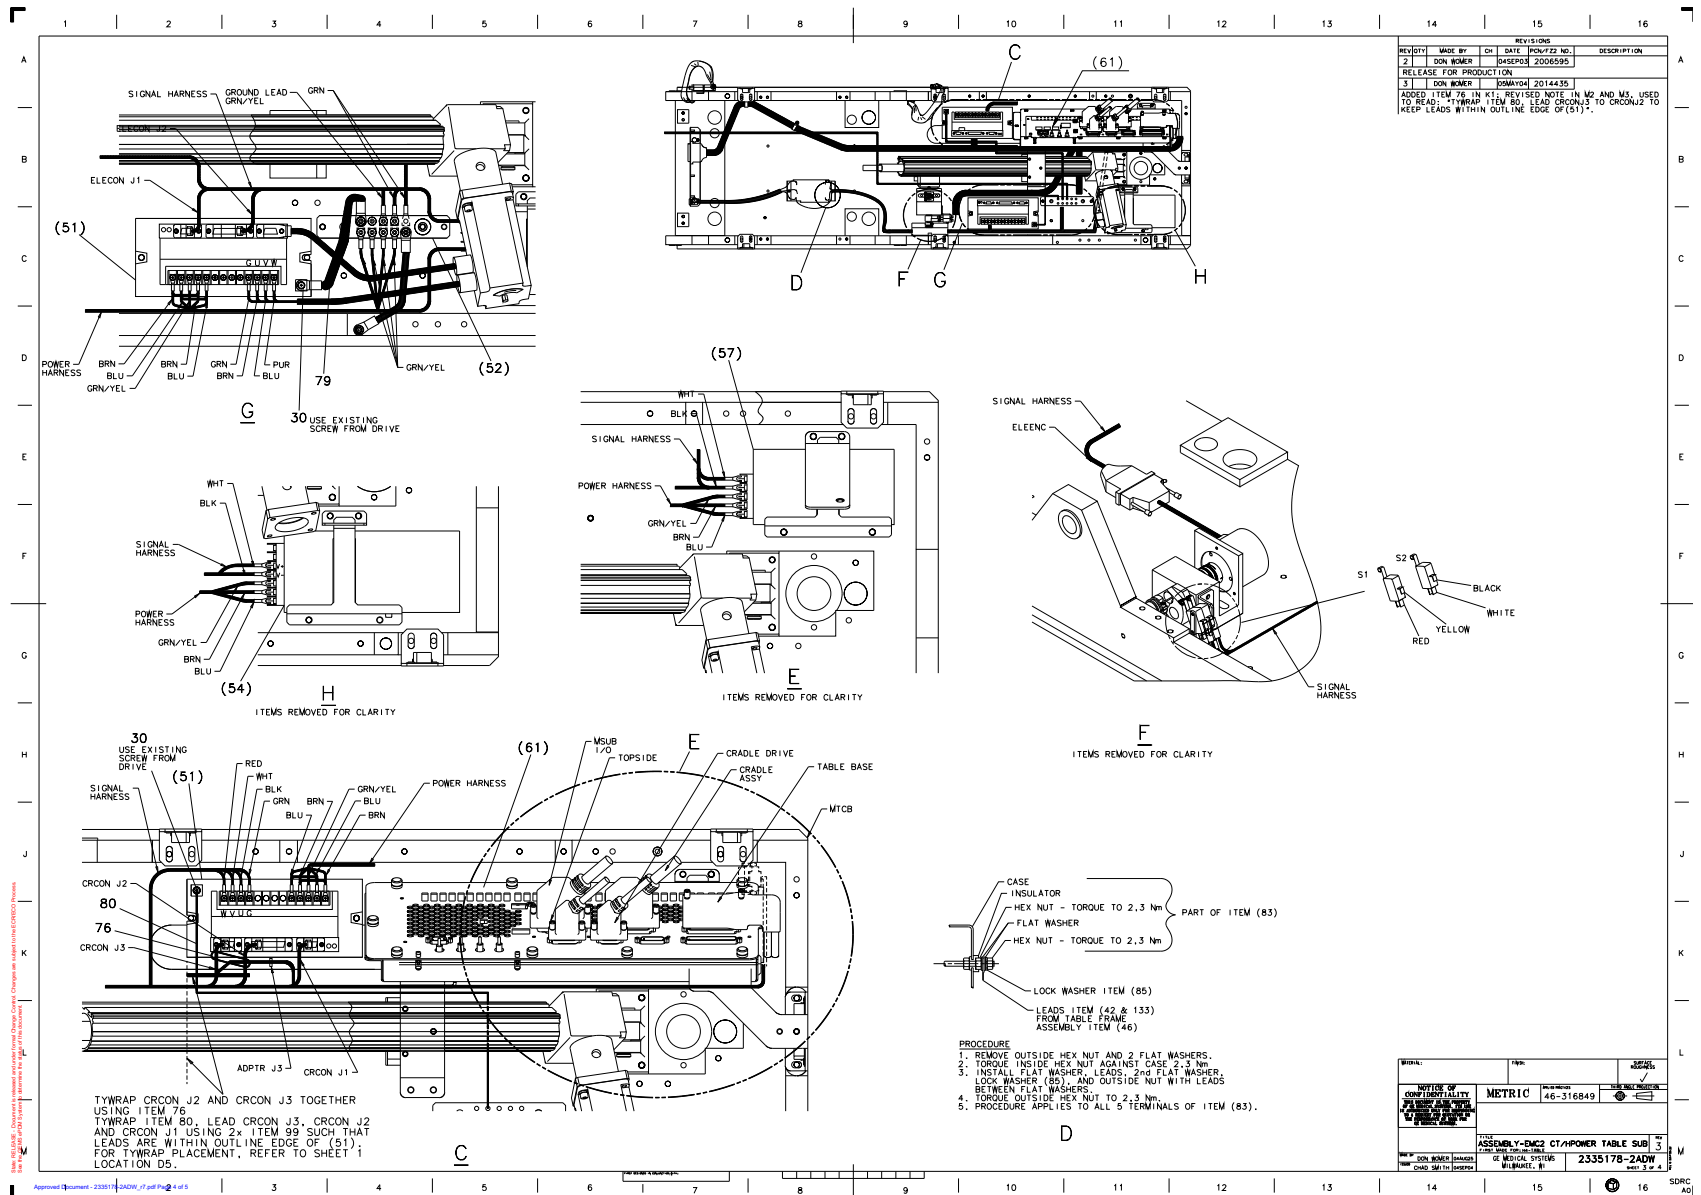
Table Subassembly (2335178-2, sheet 3, rev 3)
